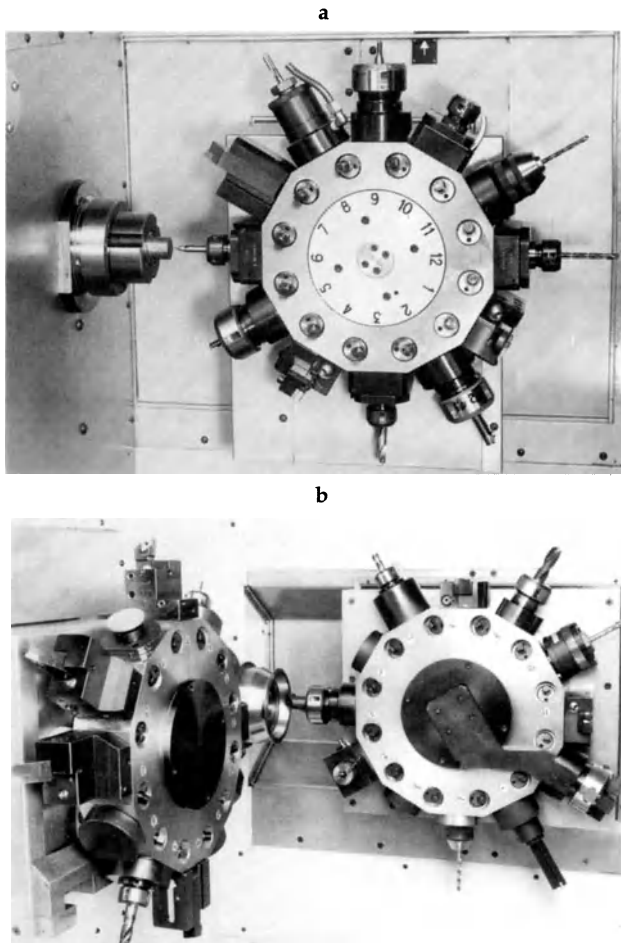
Turret configurations. a 2-axis, driven/conventional tooling. b 4-axis, twin turret with driven/conventional tooling. [Courtesy of Gildemeister (UK) Ltd.]
